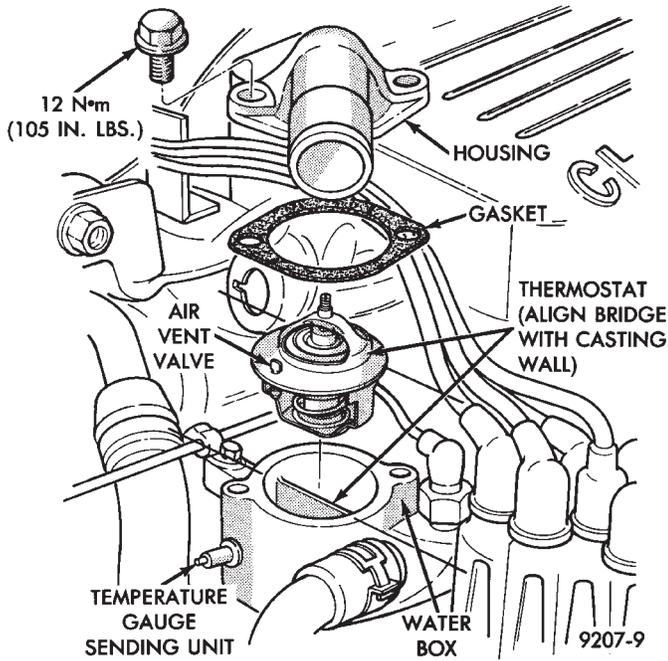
Thermostat, Housing, and Water Box—3.0L Engine
